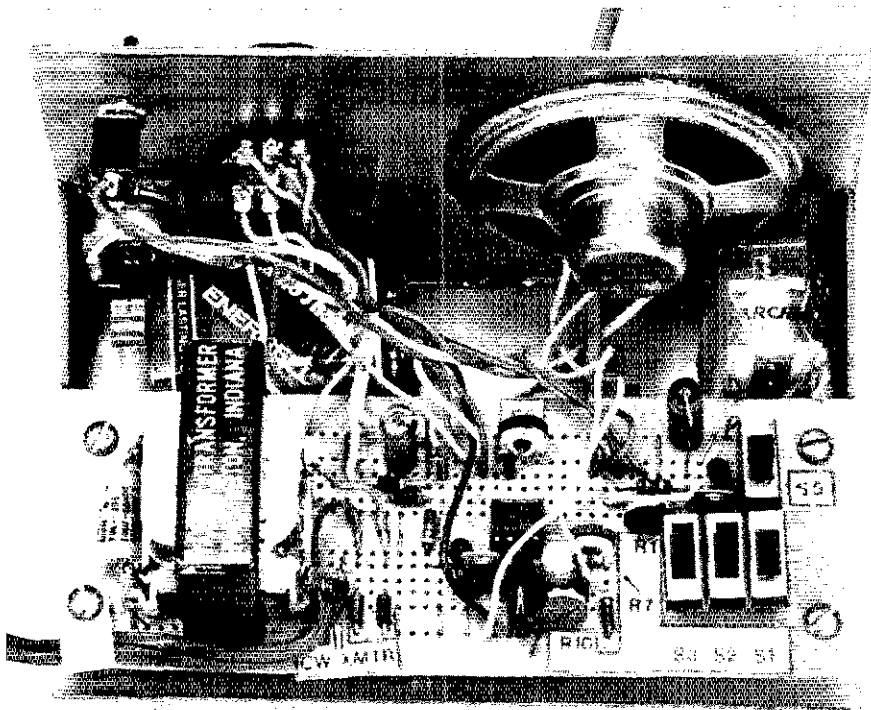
A close-up of the component layout. The components should be identified easily in the schematic, with a bit of study.
